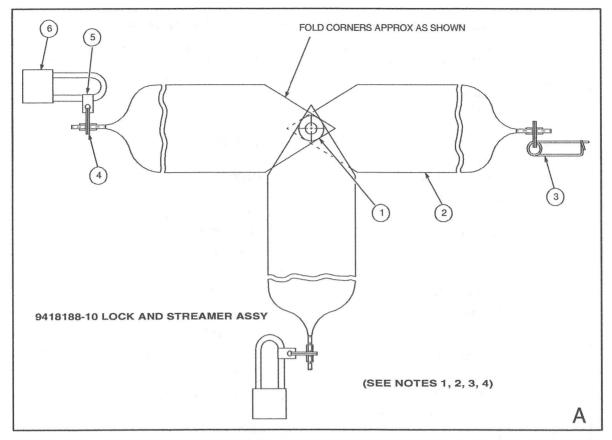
Fabrication of 9155399 Mobility Ladder and Platform Assembly. (Sheet 12)
